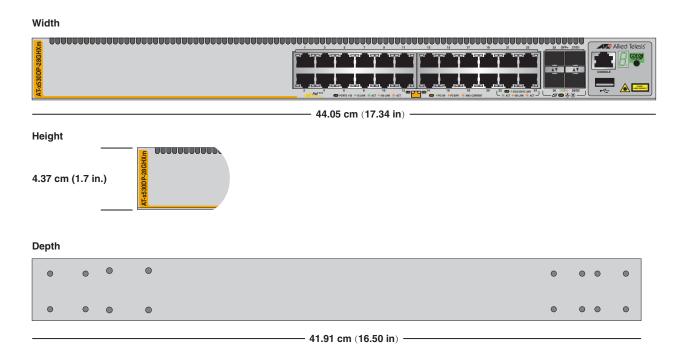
x530DP-28GHXm and x530DP-52GHXm Switch Dimensions Figure 66 illustrates the dimensions of the FAN10 module.
